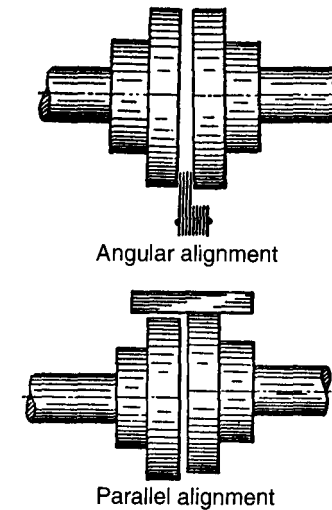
Coupling alignment, face-and-rim method with feeler gauges and a straightedge.
